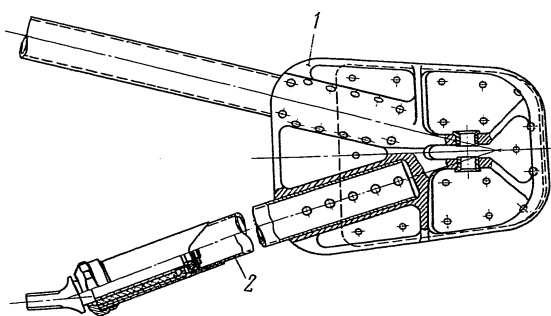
BRACE STRUT-TO-BEARING PLATE ATTACHMENT
